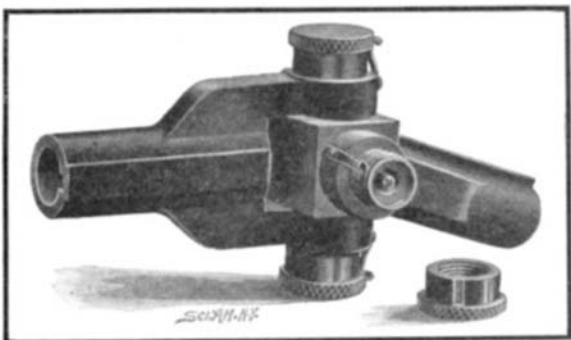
UNIVERSAL JOINT ASSEMBLED.
